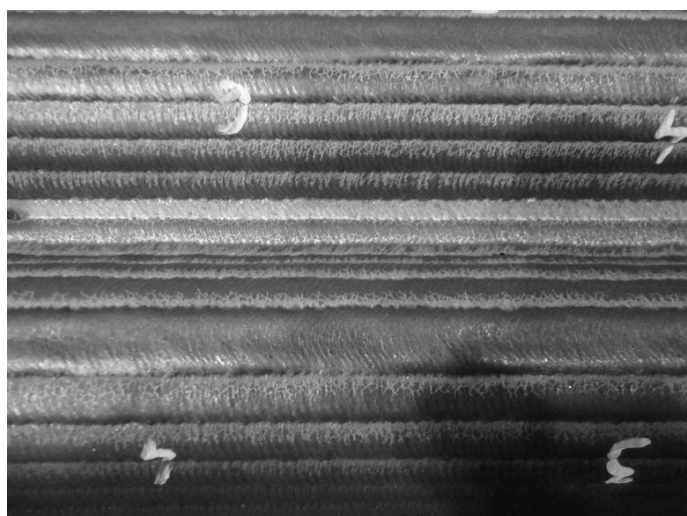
Pattern welded in the protection of the two-component gas.
